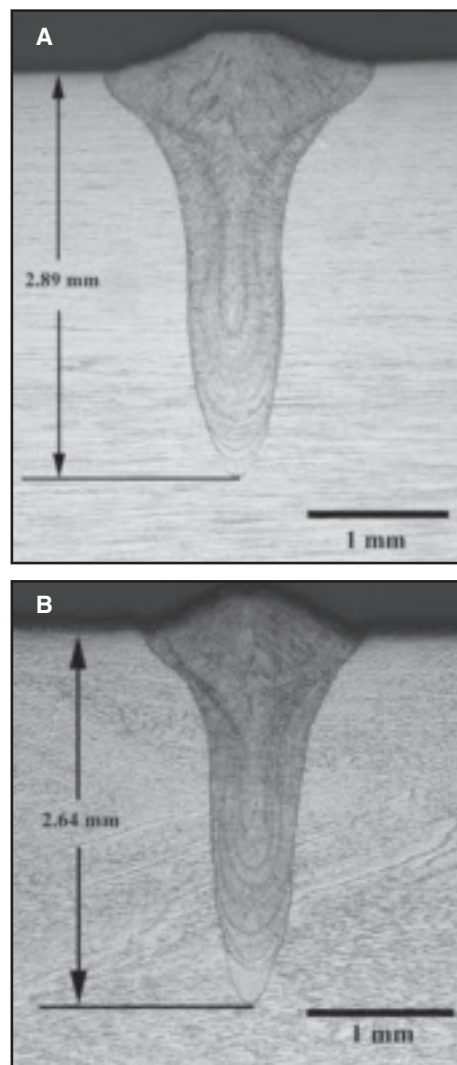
Micrographs showing the weld cross sections in 304L stainless steel produced by the following: A — The LLNL welding machine at a work distance of 210 mm and a focus condition of +11; and B — the Y-12 welding machine at a work distance of 457 mm and at the sharp focus setting for 100-kV, 10-mA beams at a travel speed of 17 mm/s.
